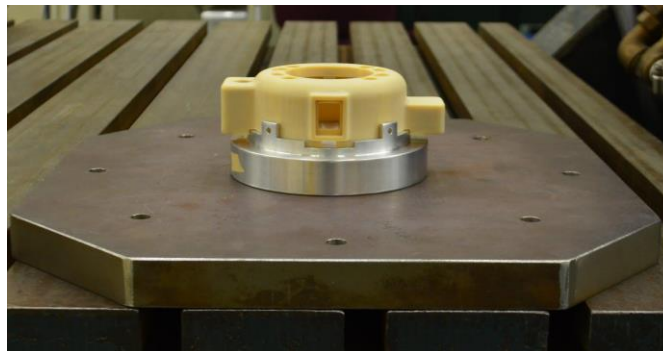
SDP Adapter Plate with attached 3-D printed Ultem 9085 Enclosure Top on the Testing Platform.
